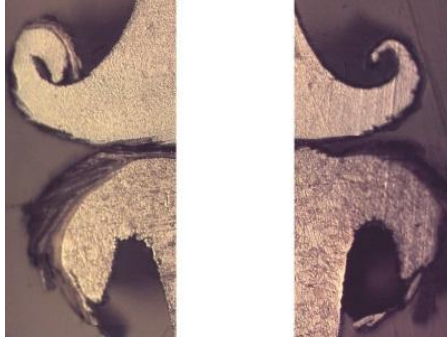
The curls of the bar-to-tube tests. Weld D34.
